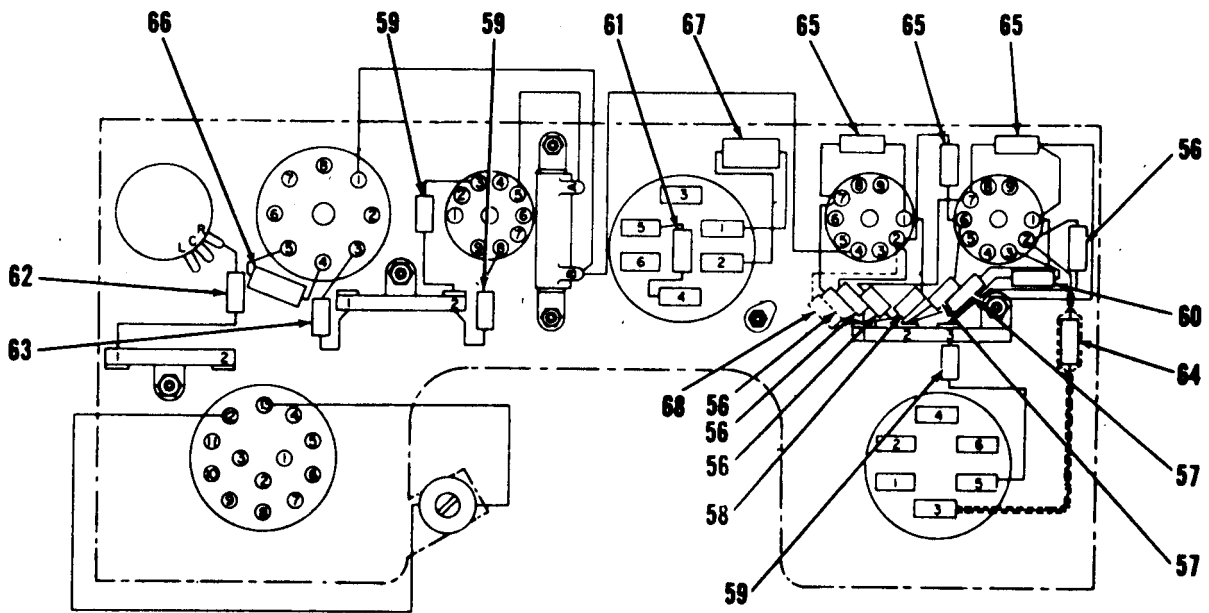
Oscillator Amplifier Assembly (Sheet 2 of 2).
